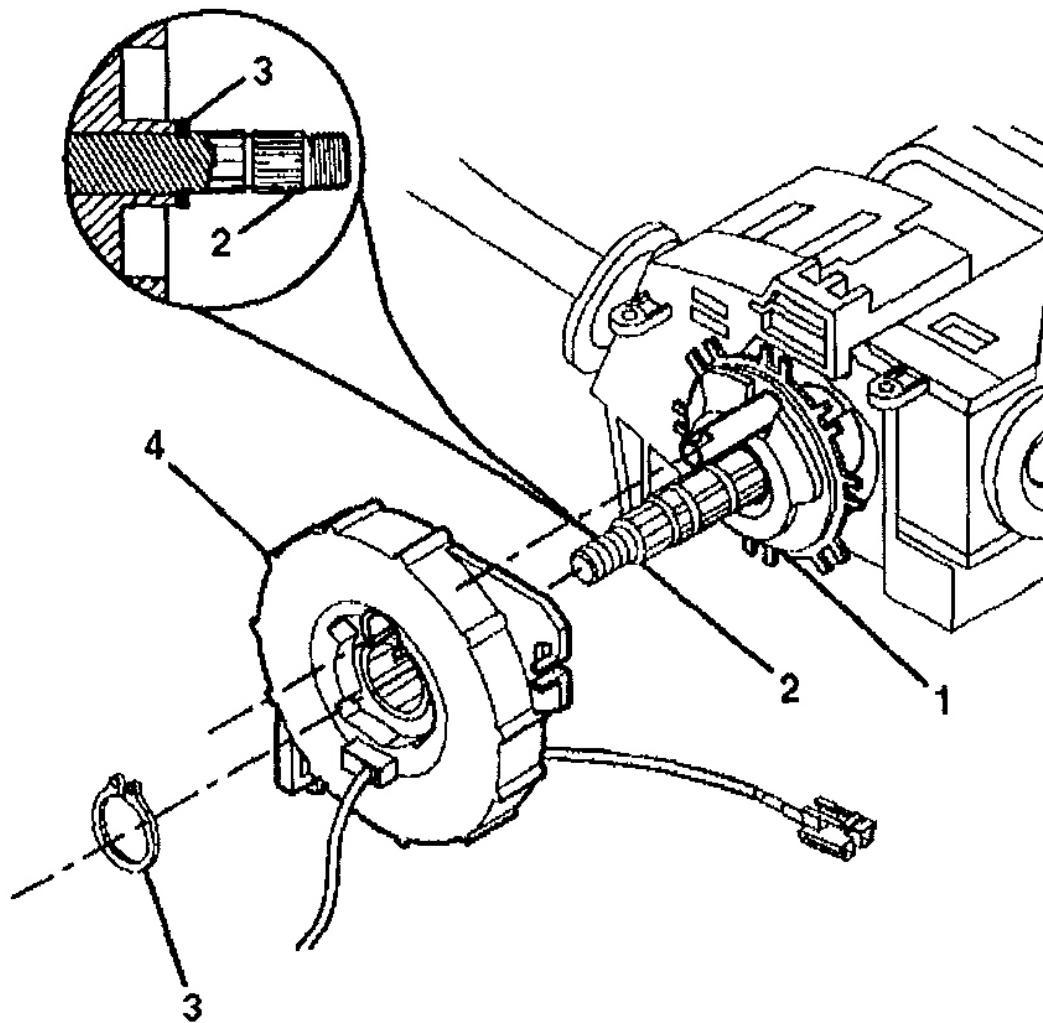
Aligning Steering Shaft Assembly Block Tooth
